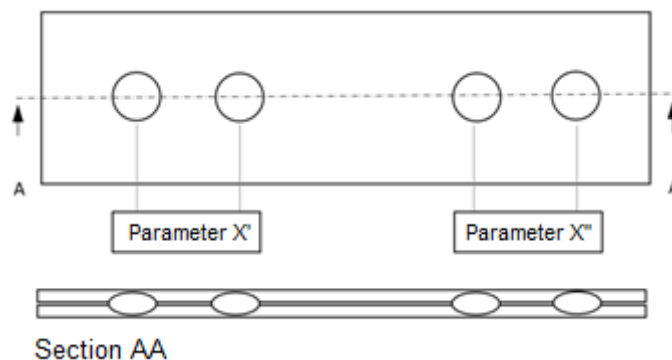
Tests samples and spot welding locations used for the present work for the 22MnB5 press hardening steel type.
